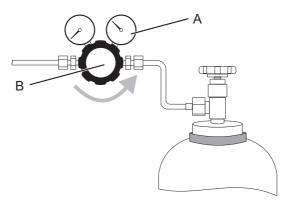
Checking gas cylinder pressure, closing pressure regulator
